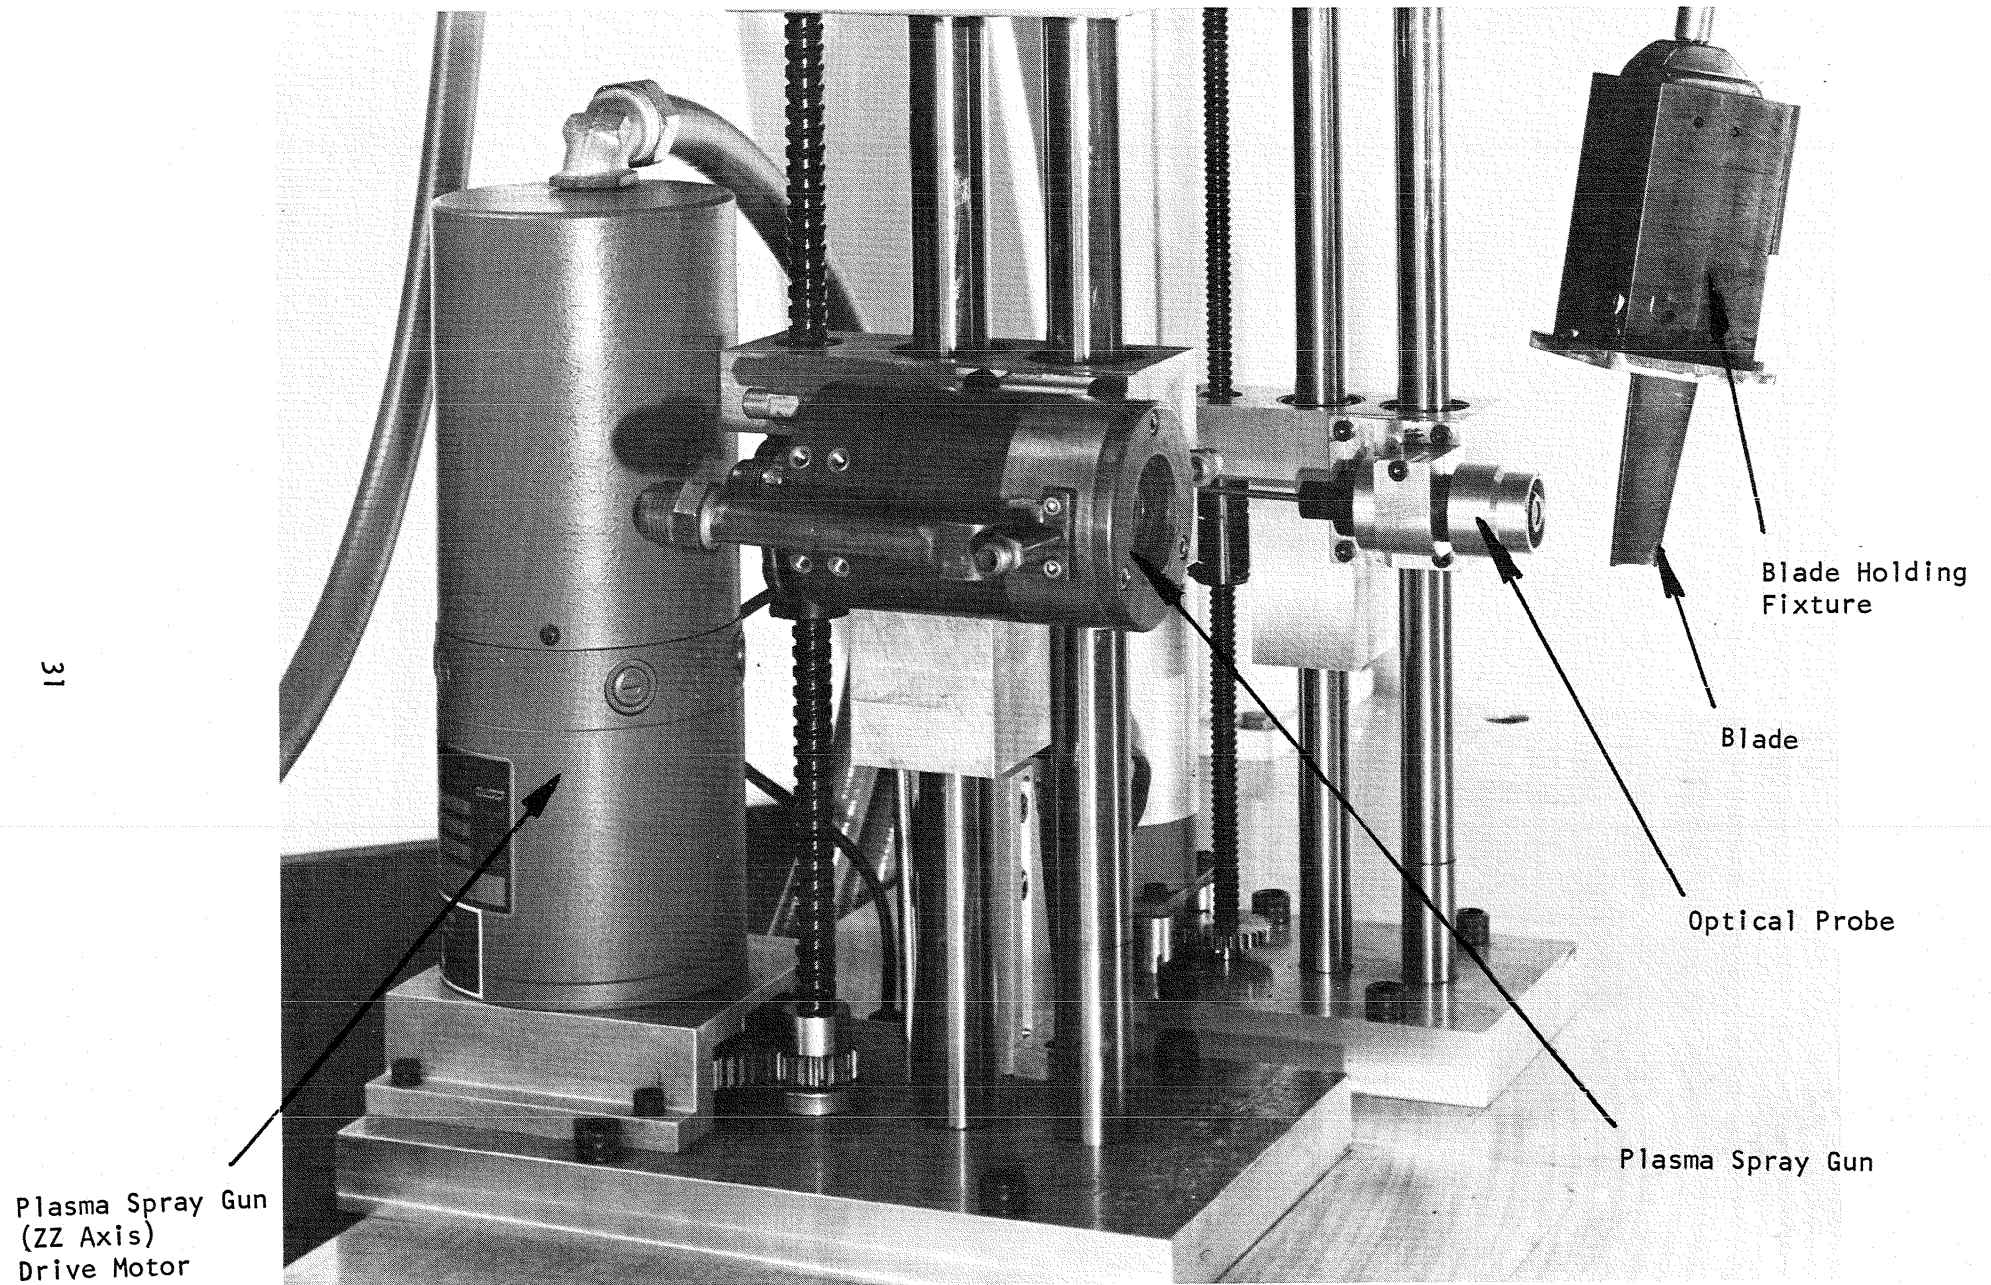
Closeup of Blade and Optical Probe on Mechanism Model No. 1 During Gage Point Measurement Routine. Spray Gun also Shown in Left Foreground.
